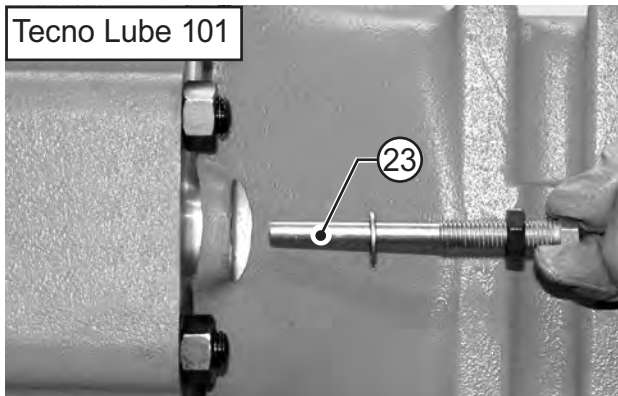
Remove screws complete with nuts and seals. Replace seals, apply silicone-based Tecno Lube /101 grease to the screws and install all parts into the arm.
